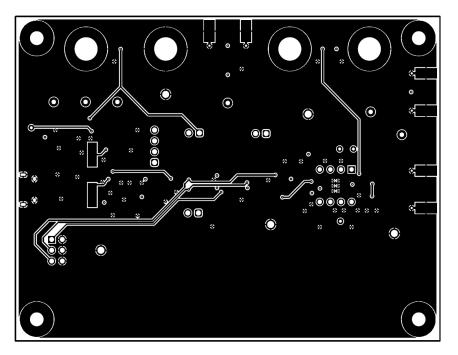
DAC8811EVM PCB Mid Layer 2 Layout
